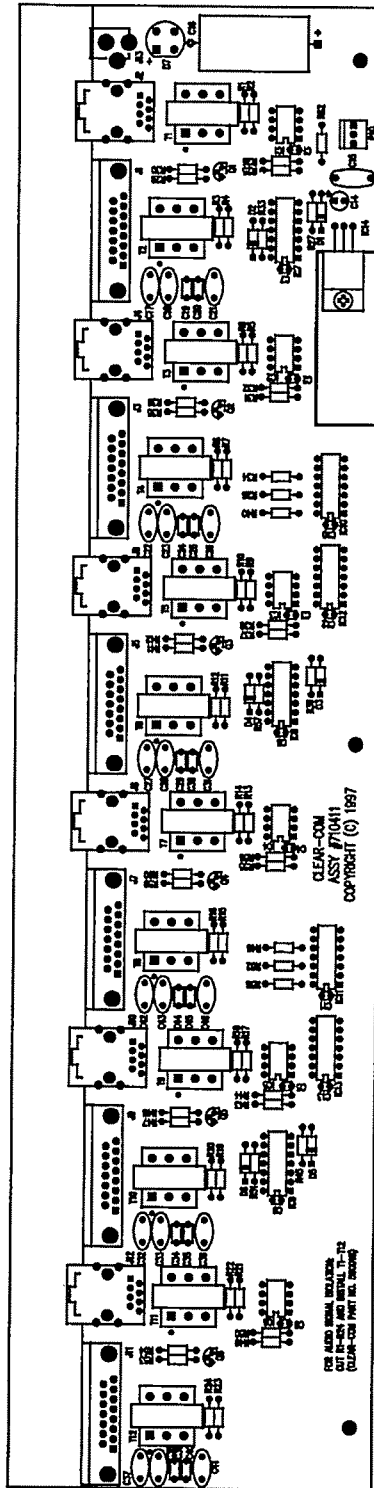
Assembly Drawing - PIA-32 PCB, Rev. B
